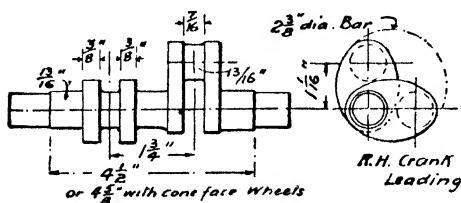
Method of Turning an Oval-web Crank Axle Out of a Round Bar.
